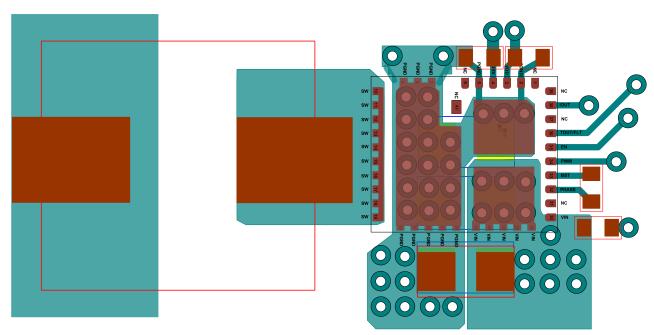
Recommended PCB Layout (Placement and Top Layer PCB)
